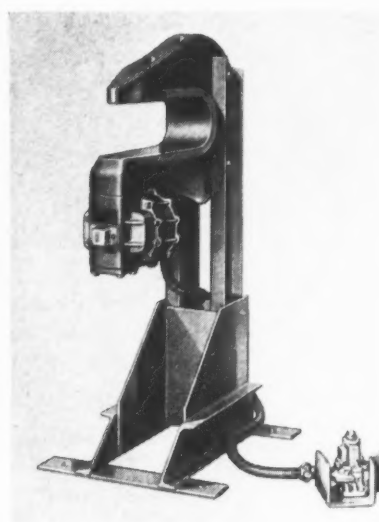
Stationary Squeeze Riveter for Aircraft Assembly Work
